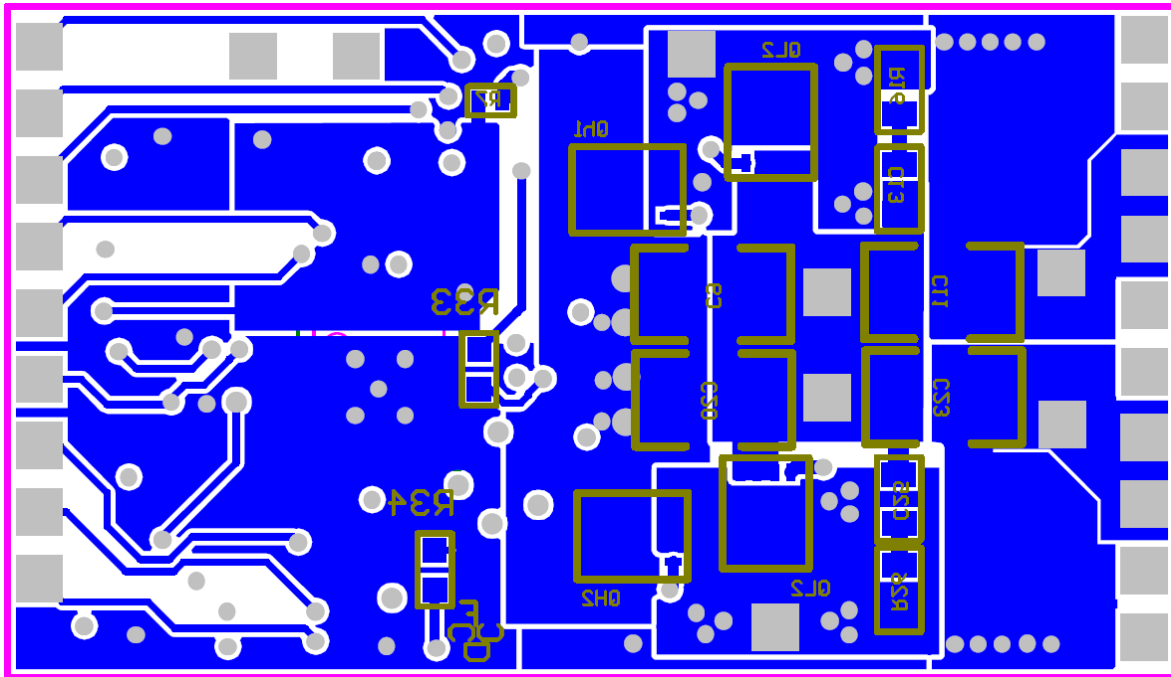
Bottom Assembly Drawing for 1829 Evaluation Board (looking through from top)
